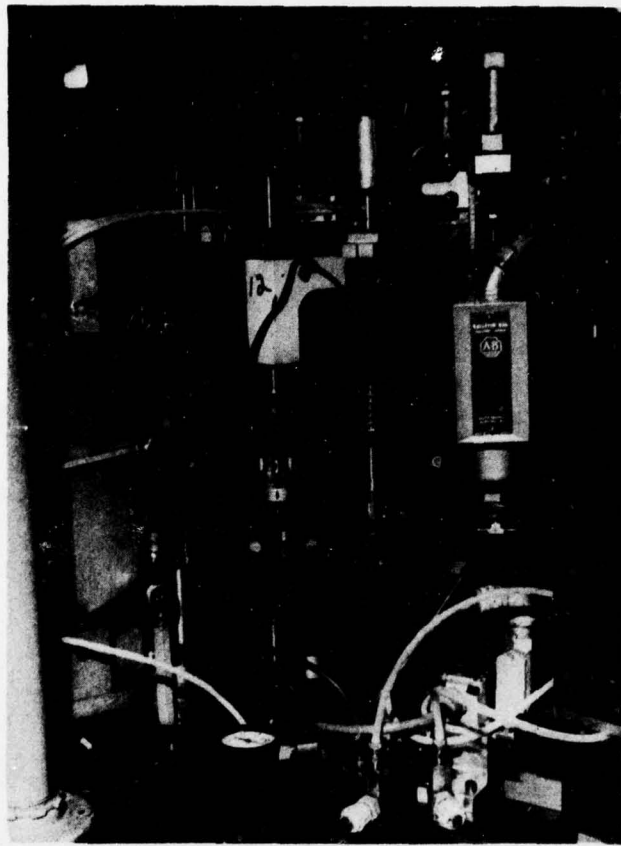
ADAM Release Mechanism and Case Assembly Machine
